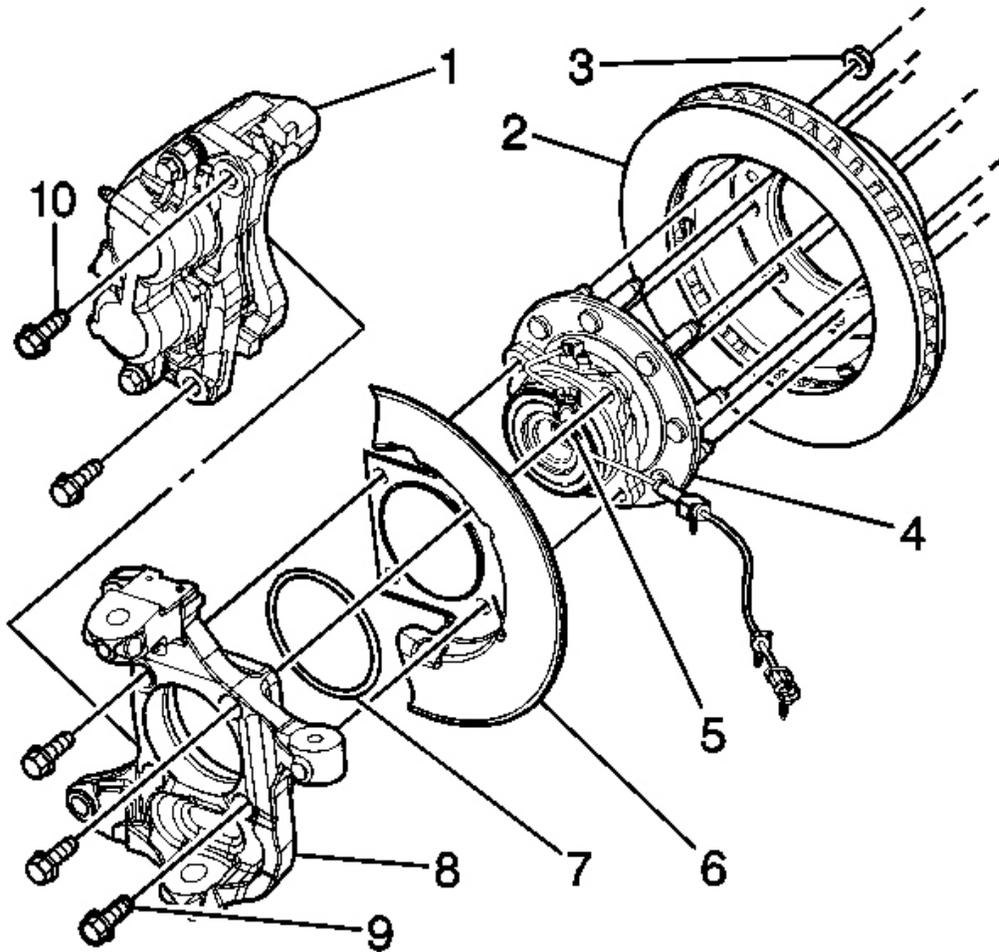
Wheel Hub And Bearing (RWD, 25/35 Series)
